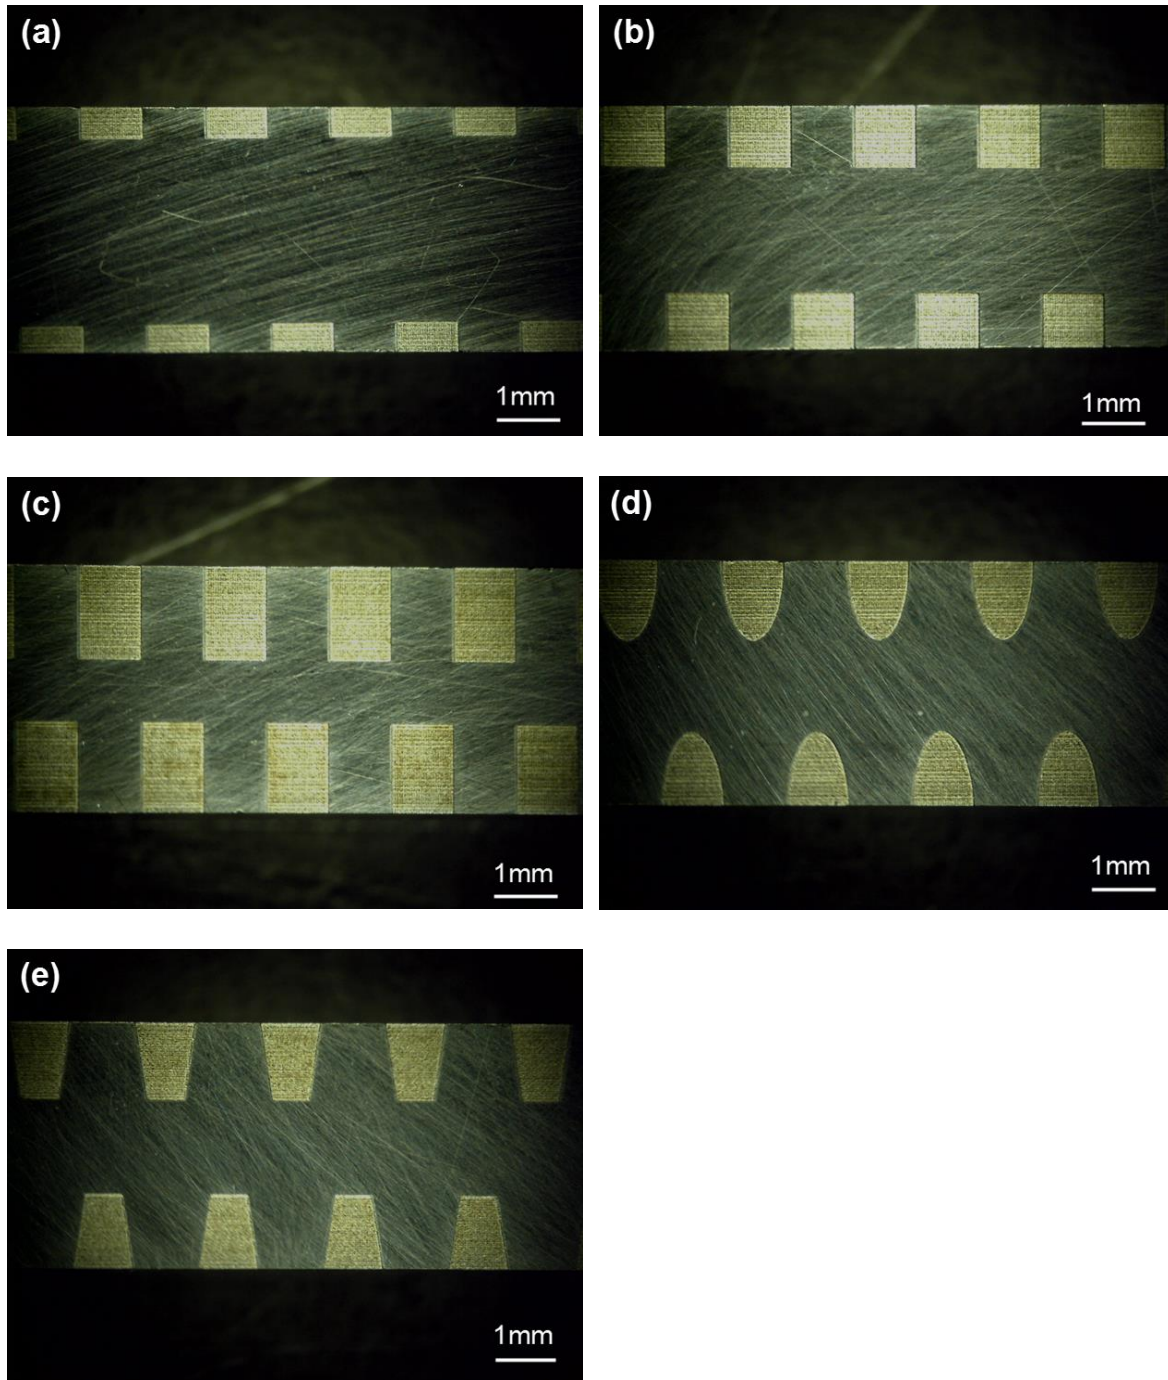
Images of pocketed specimens: (a) rectangular pocket R1; (b) square pocket R2; (c) rectangular pocket R3; (d) semielliptical pocket E1; (e) trapezoidal pocket T1
